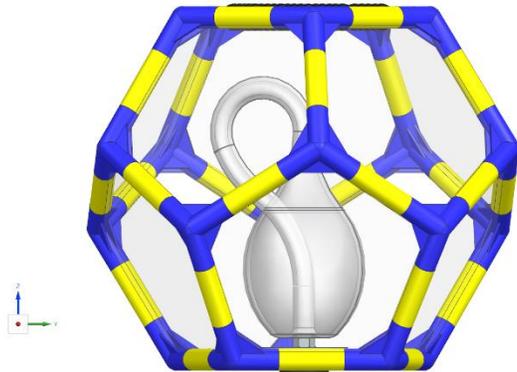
Dodecahedron and Klein Bottle CAD Sub-Assembly
